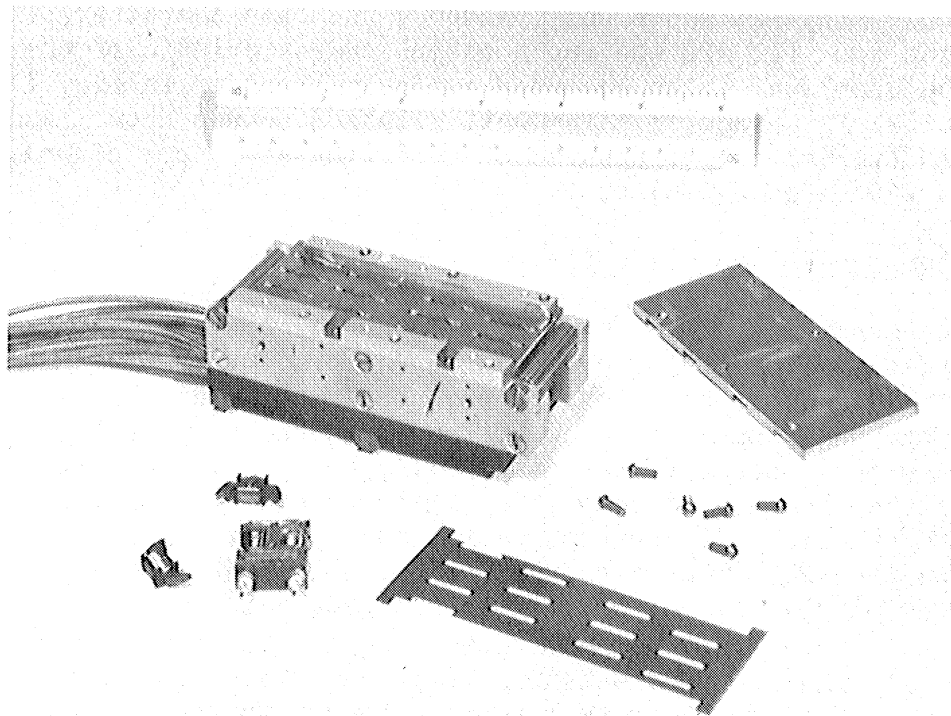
Magnetic Head Assembly and Crosstalk Shield
